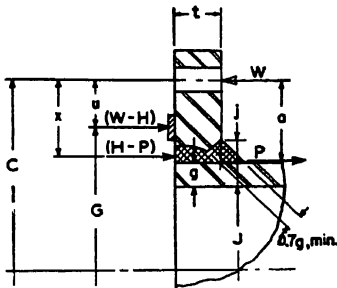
Through-welded Ring Flanged Fitting.
